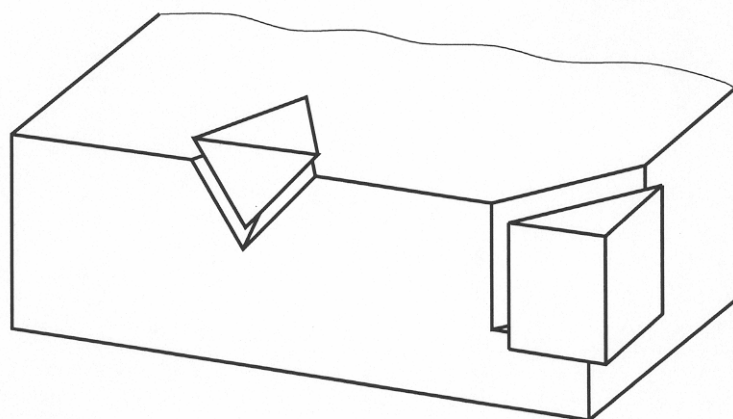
Plate (thickness > 6 mm), forgings and castings
